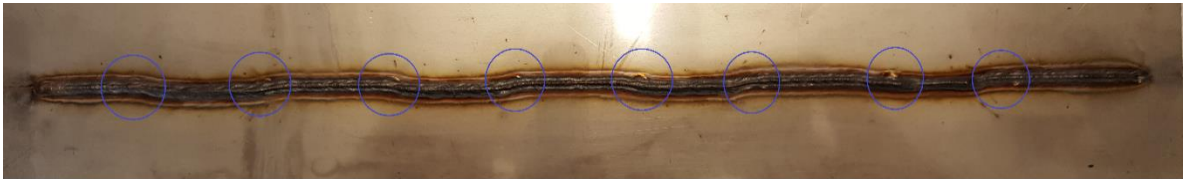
Welded plate from experiment. Blue circles indicate the position of the tack welds.
